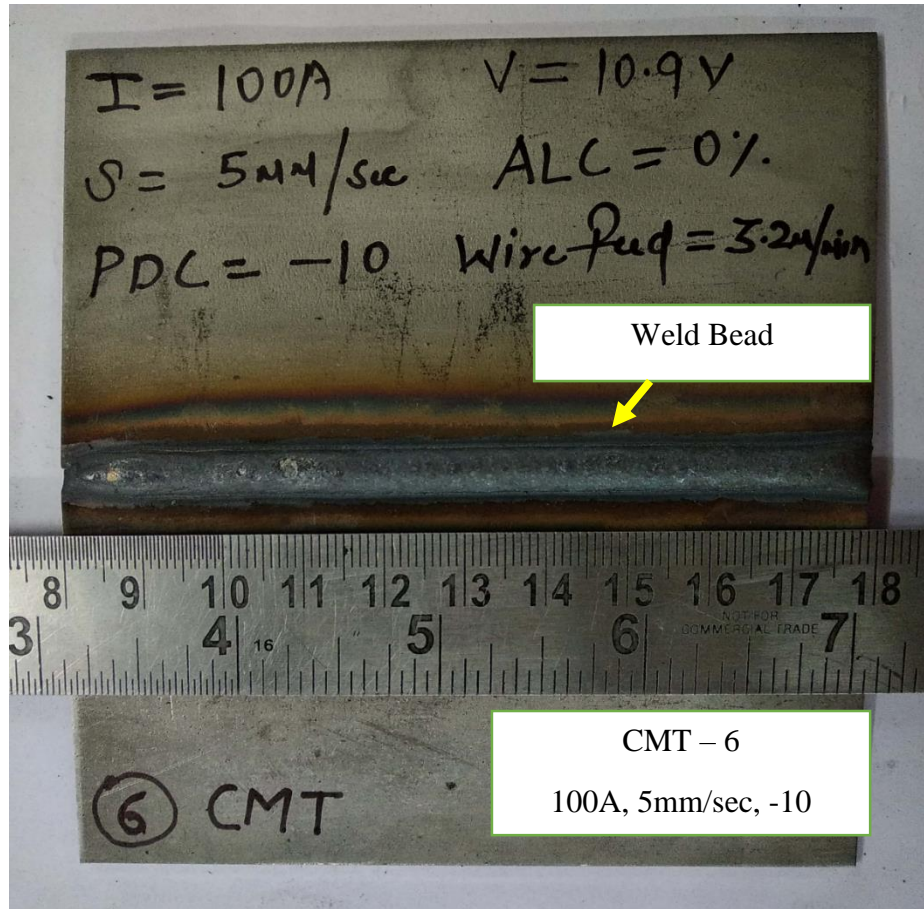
Image of CMT welded SS202 Sample 6 of thickness 1.58 mm
